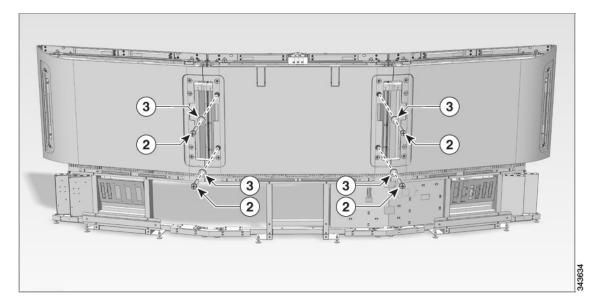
Installing the Center Rear Panel (2 of 2)—Installation Detail
